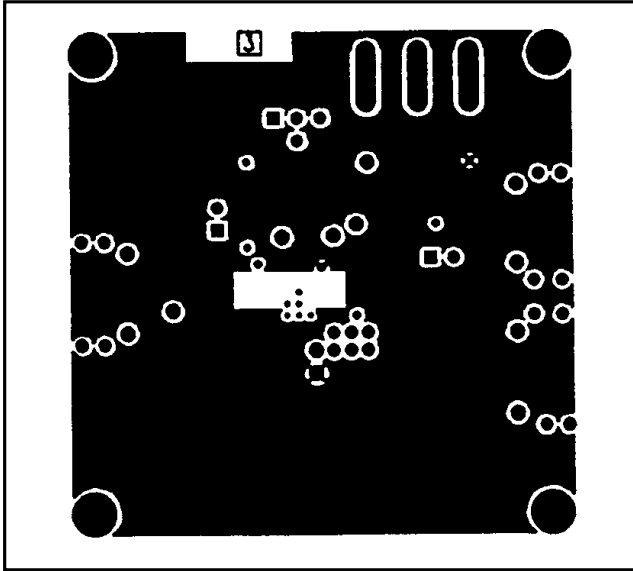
MAX3760 EV Kit PC Board Layout—Power Plane
